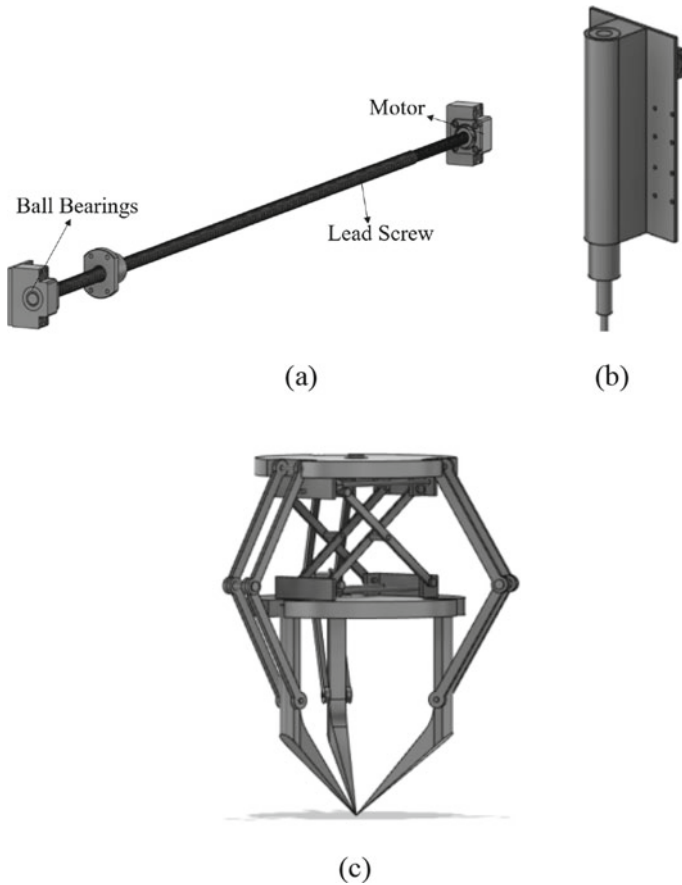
Weeding mechanism components a ball screw assembly; b telescopic slides; and c end effector gripper
